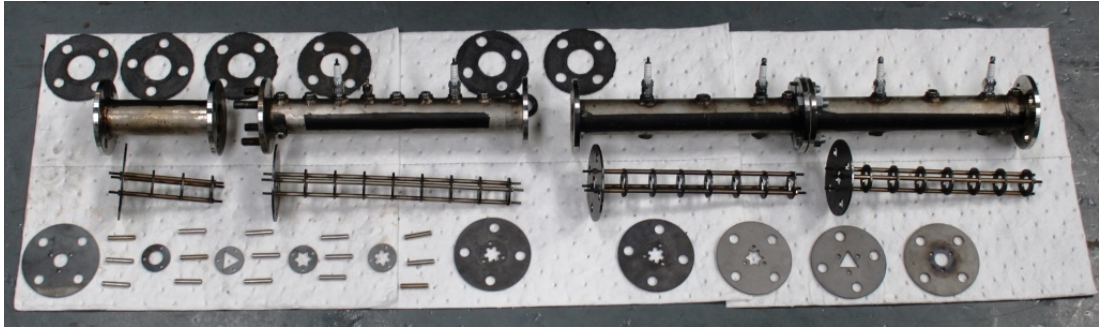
Dismantled PDE tube and fractal orifice assembly.
